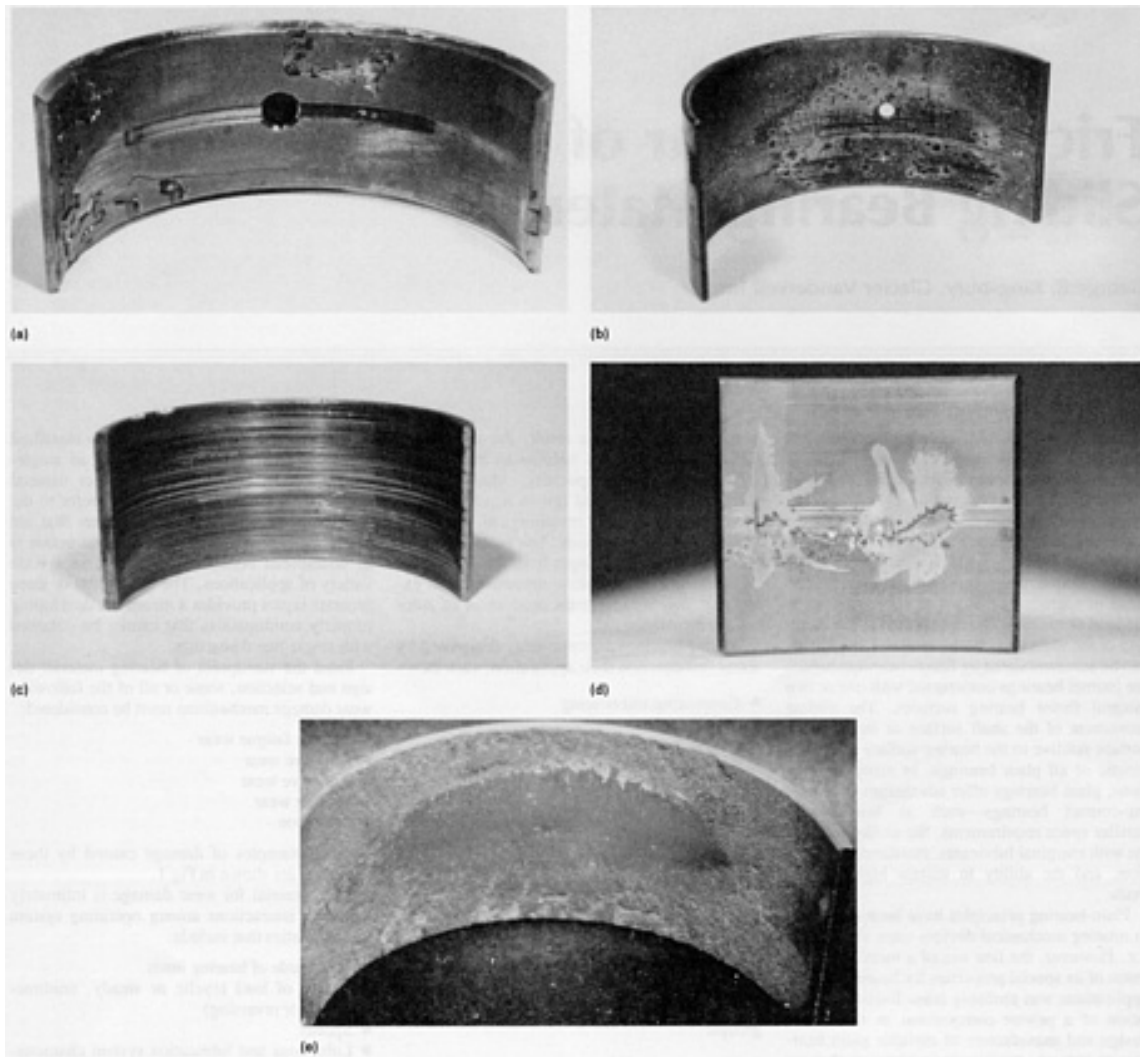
Typical damage in sliding bearings caused by different wear processes. (a) Surface fatigue. (b) Abrasive wear. (c) Adhesive wear (scoring). (d) Erosive wear (cavitation). (e) Corrosion
